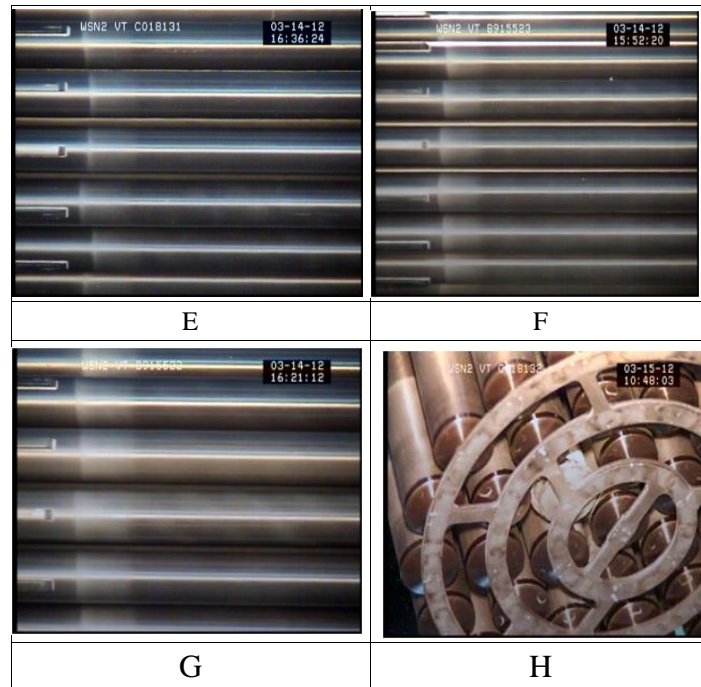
Fuel inspection image of Wolsung unit 2.
